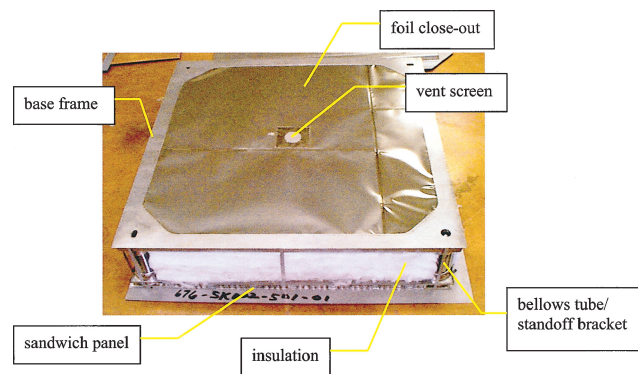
TPS panel assembly with insulation and bottom CP Ti foil closeout installed (bottom view).
